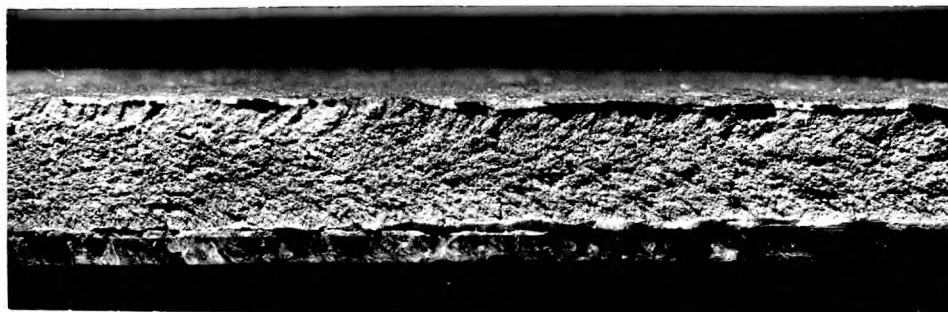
Fracture surface corresponding to fig. 7.12. Scale full size.
